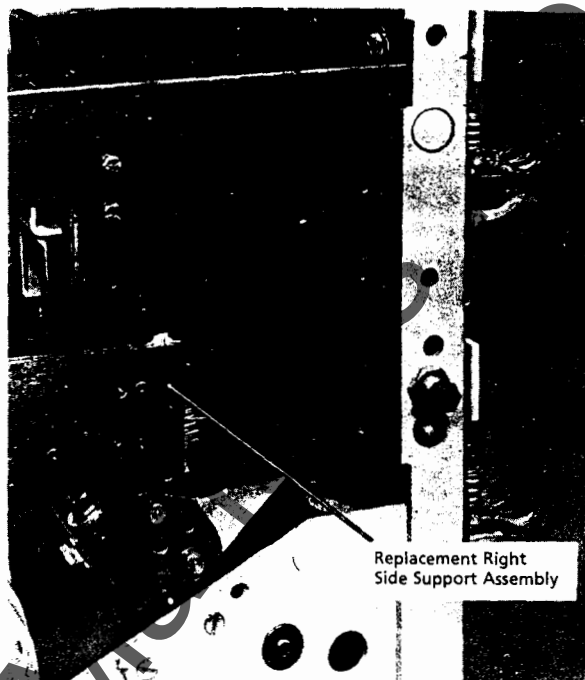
Replacement side support installed on AK/AKT/AKU breakers - AKD 5 equipment only.
